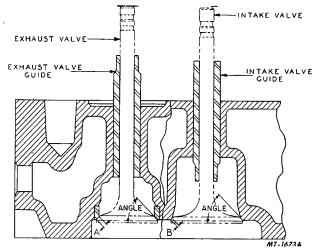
Sectional View of Valves, V-304, V-345, V-392 Engines
